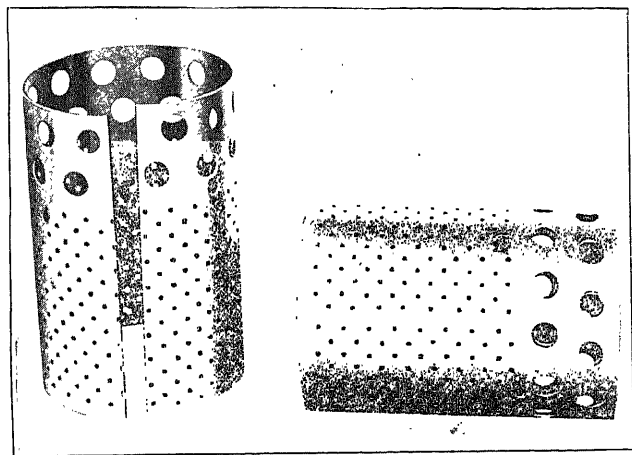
Oil Stove Burner Tubes Before and After Welding.
